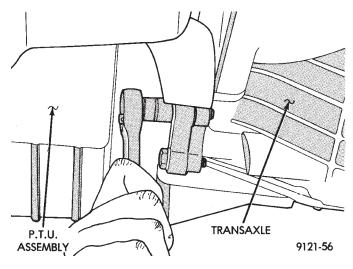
Remove P.T.U. Mounting Bolts (4)
